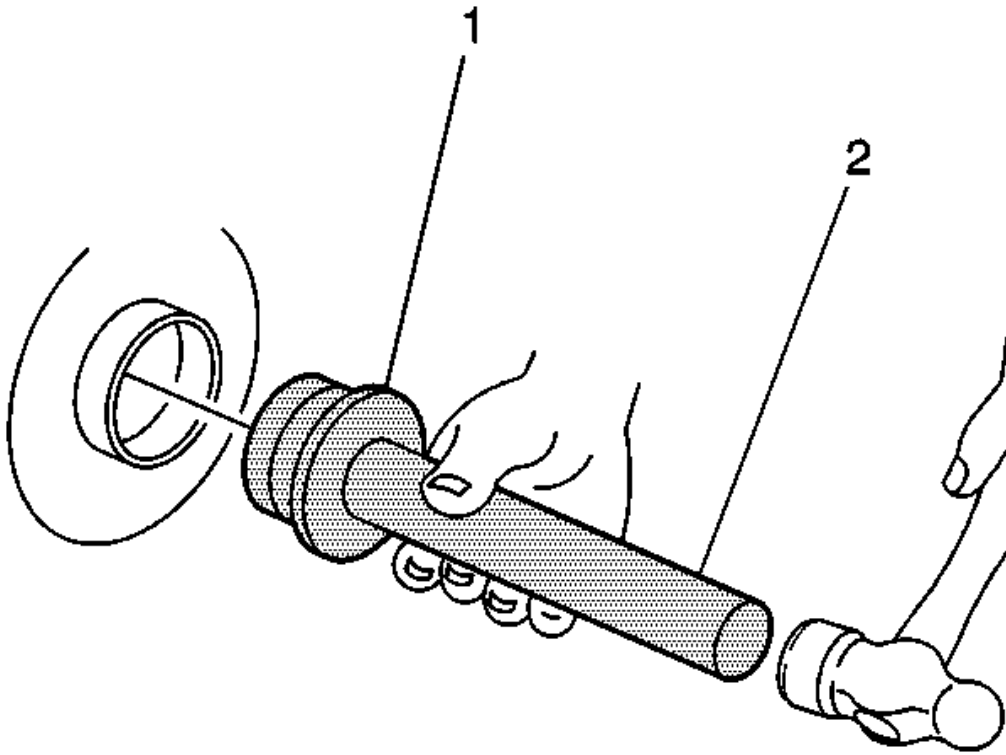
Installing Axle Shaft Bearing Using J 23690 Or J 29709 & J 8092
